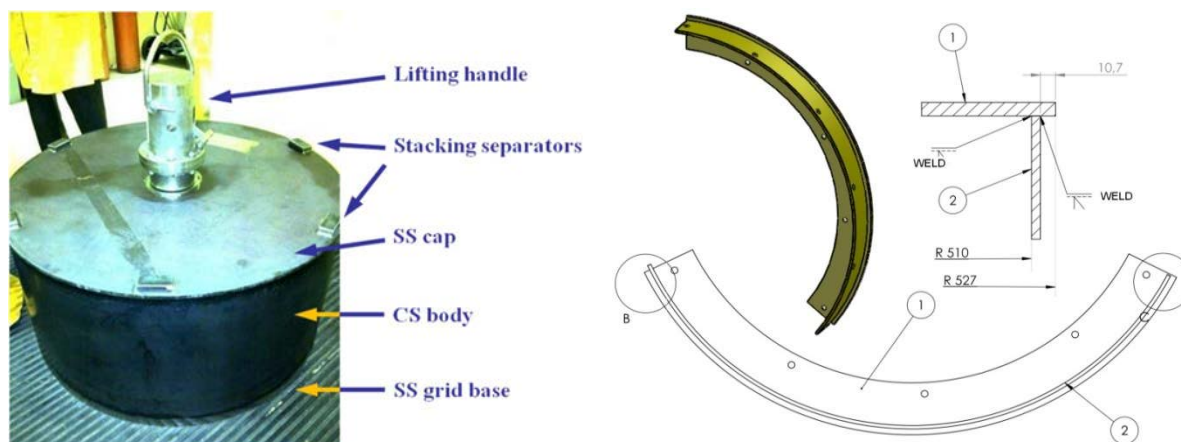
(a) SFE metallic container. (b) map of section extracted for analysis. Dimensions in mm (courtesy of CNEA).
